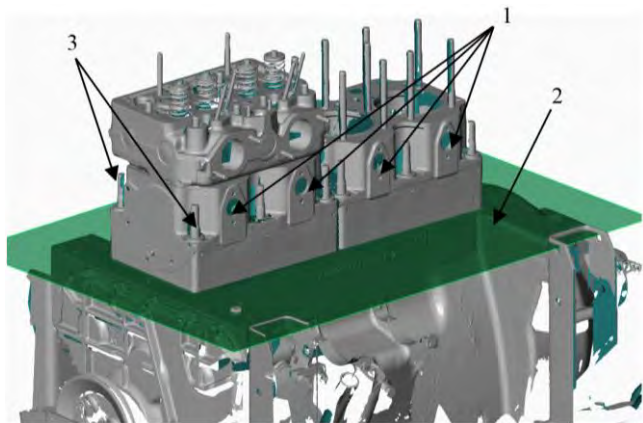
3D scan of the base engine: 1 – places for mounting the factory manifold, draining liquid from the cylinder block; 2 – the plane of division of the cylinder block and the engine block; 3 – pins on which the support plate is mounted
